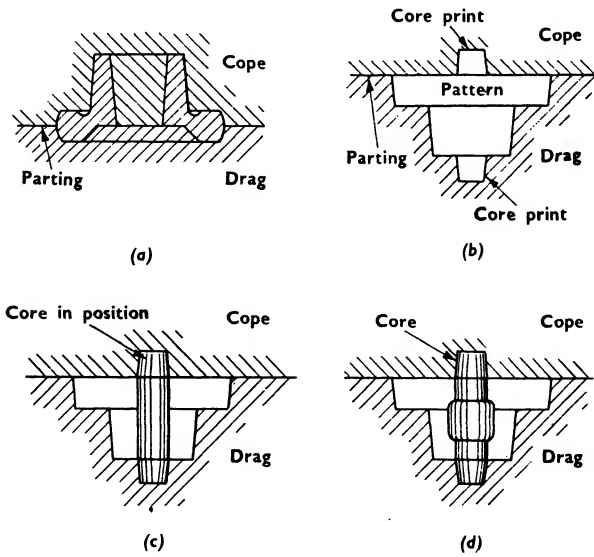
B. MOULDING OF A PATTERN INCORPORATING A CORE
